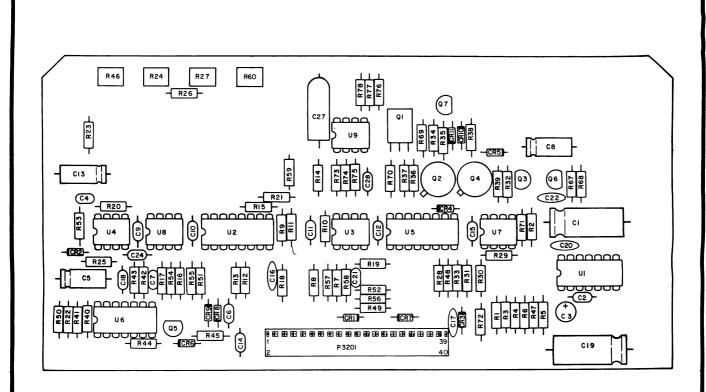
GENERATE AUDIO PC BOARD ASSEMBLY
